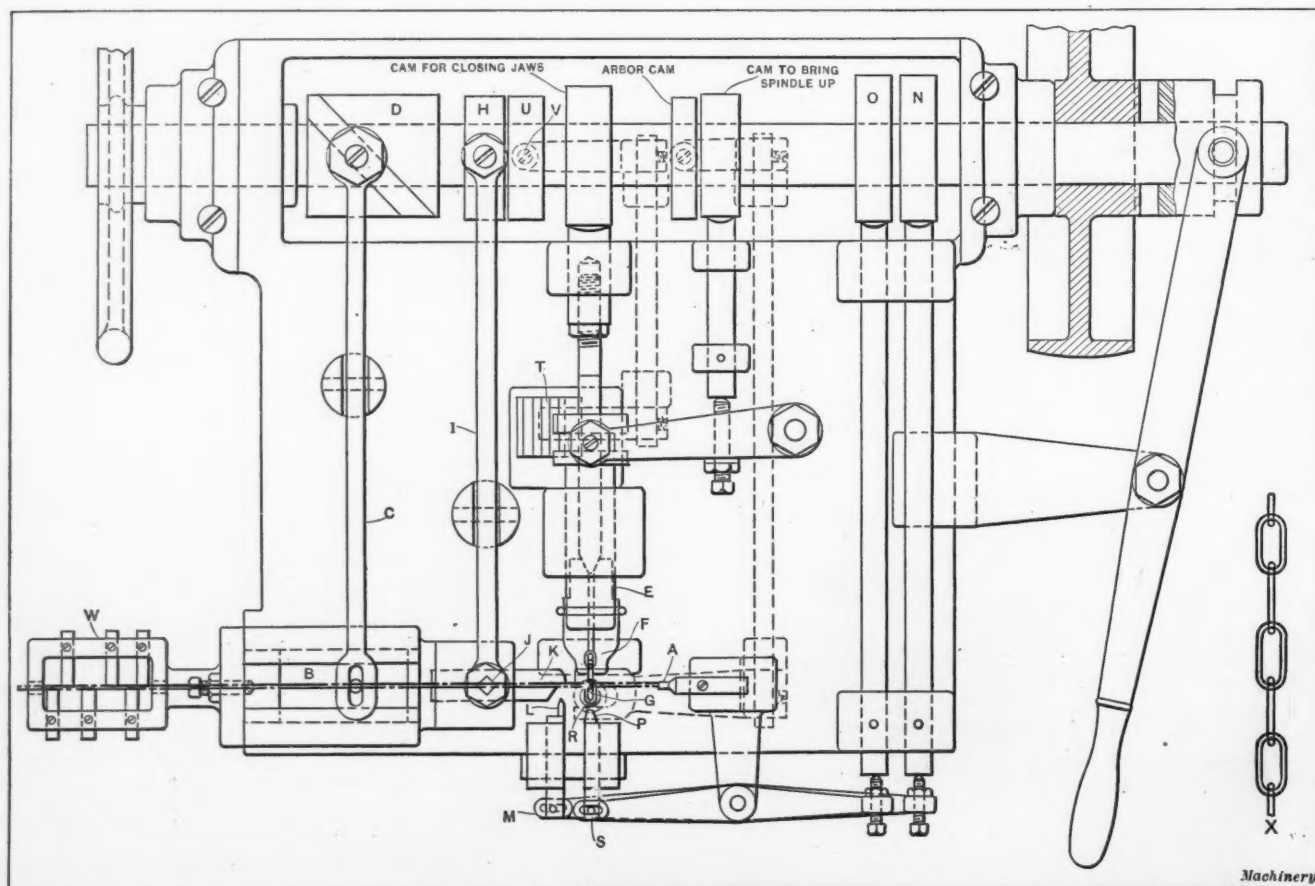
Lay-out showing Motions of Machine which makes Jewelry Chain shown at X
